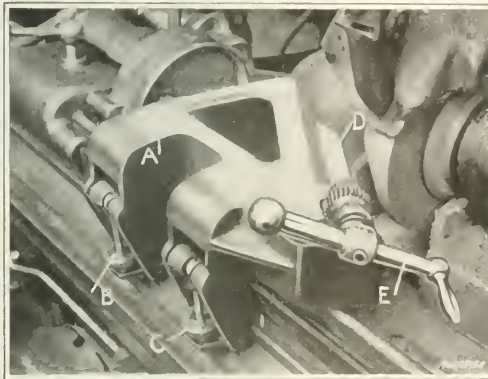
Angular Wheel Truing Device for Use on Plain Cylindrical Grinding Machine
